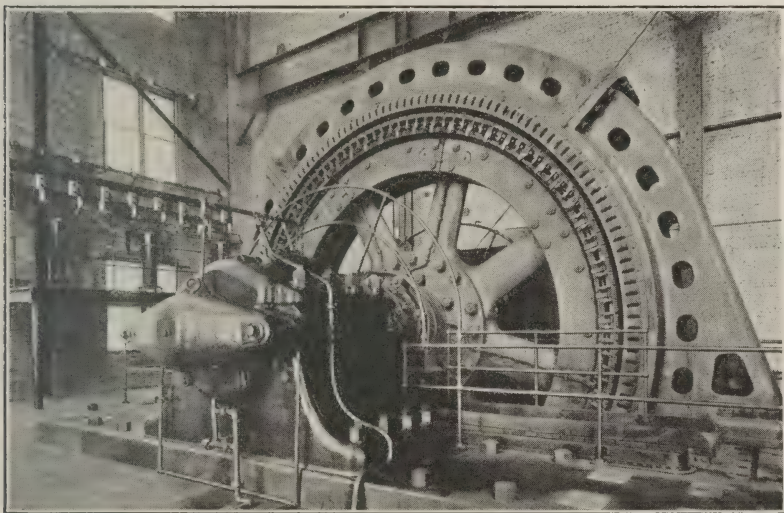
6000-H.P. INDUCTION MOTOR, RAIL MILL, INDIANA STEEL COMPANY
